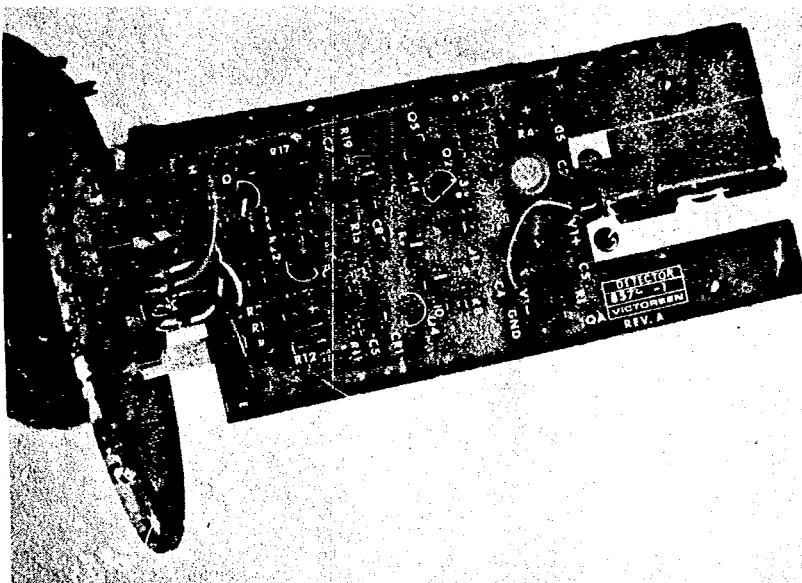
HP-212 DETECTOR, P.C. BOARD COMPONENT SIDE
